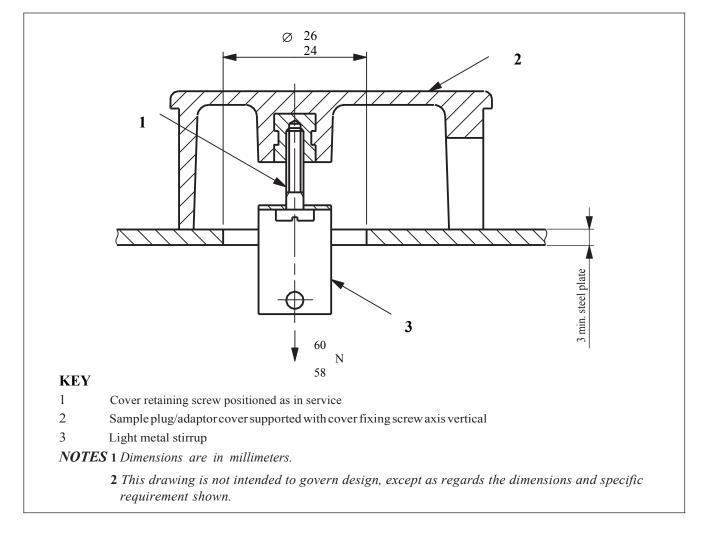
Apparatus for testing plug cover fixing screws (see 12)
